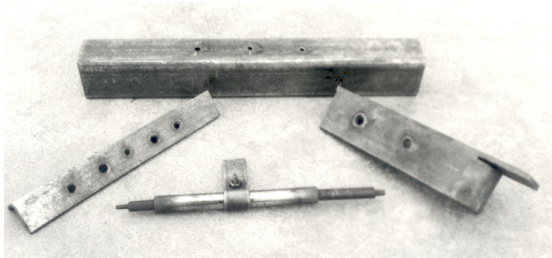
Examples of hole piercing in 3 mm thick angle iron, 2mm thick box beam, and 4mm thick angle iron using the single carbon electrode.
